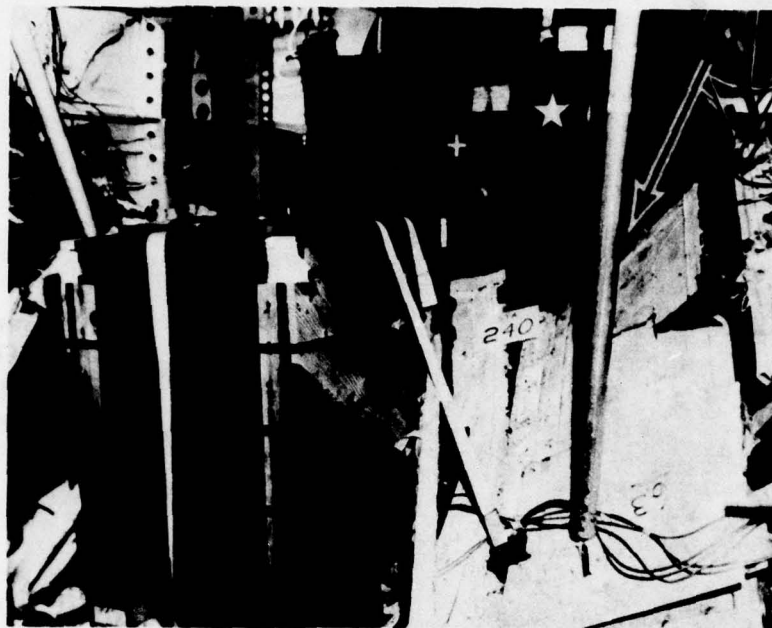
CH-47A Crash Test – Damage to Floor in Area of Main Landing Gear (View Looking Forward).
